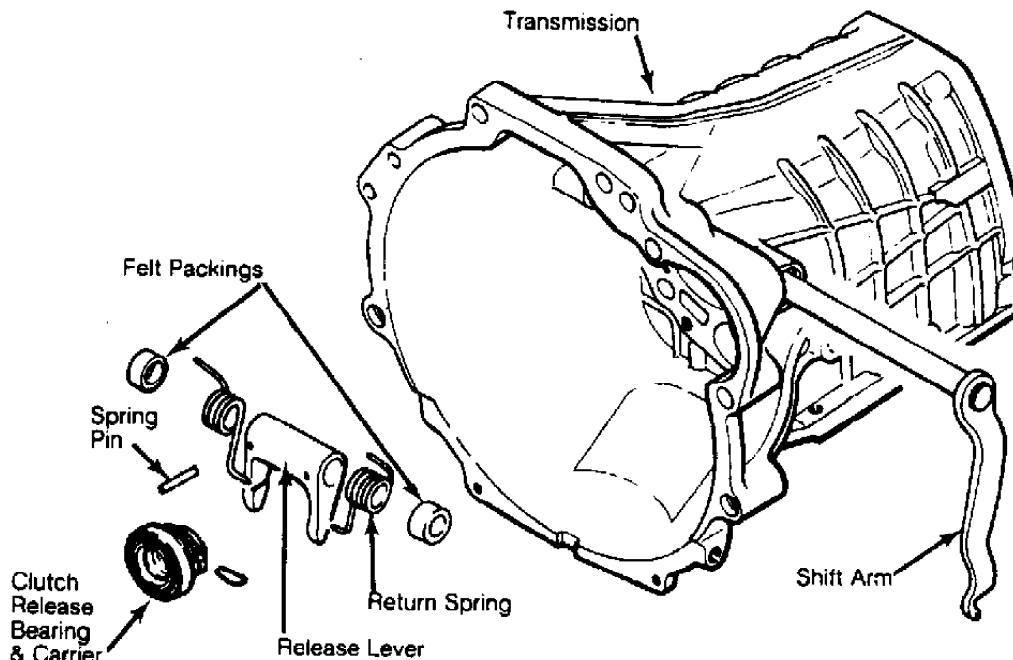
View Of Clutch Release Bearing & Shift Arm Assembly (RWD)
